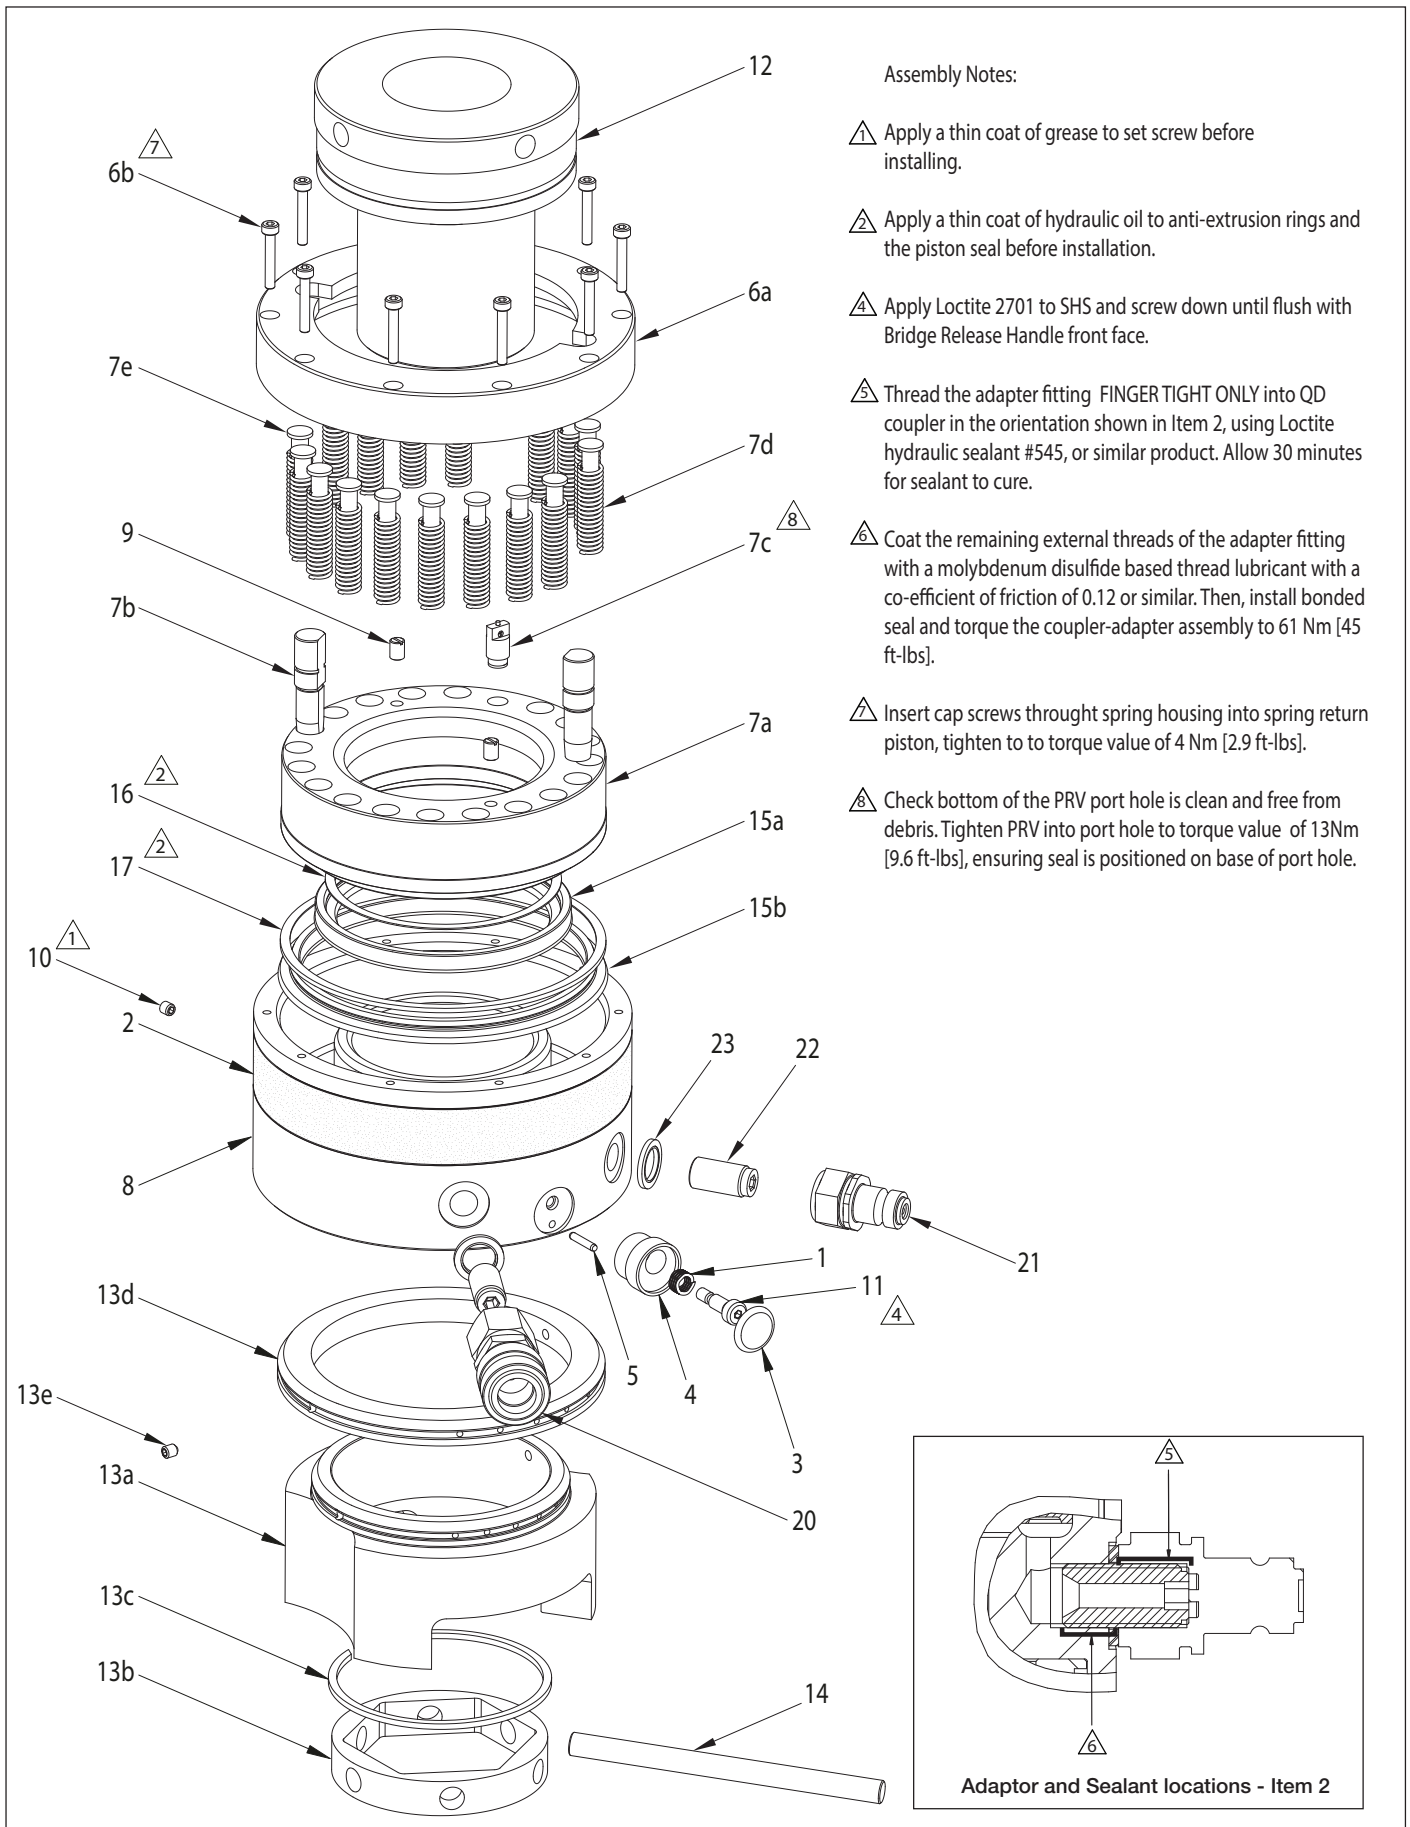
, Exploded View, HydraMax® Series Hydraulic Tensioner (Models HM08, HM09, HM10)
